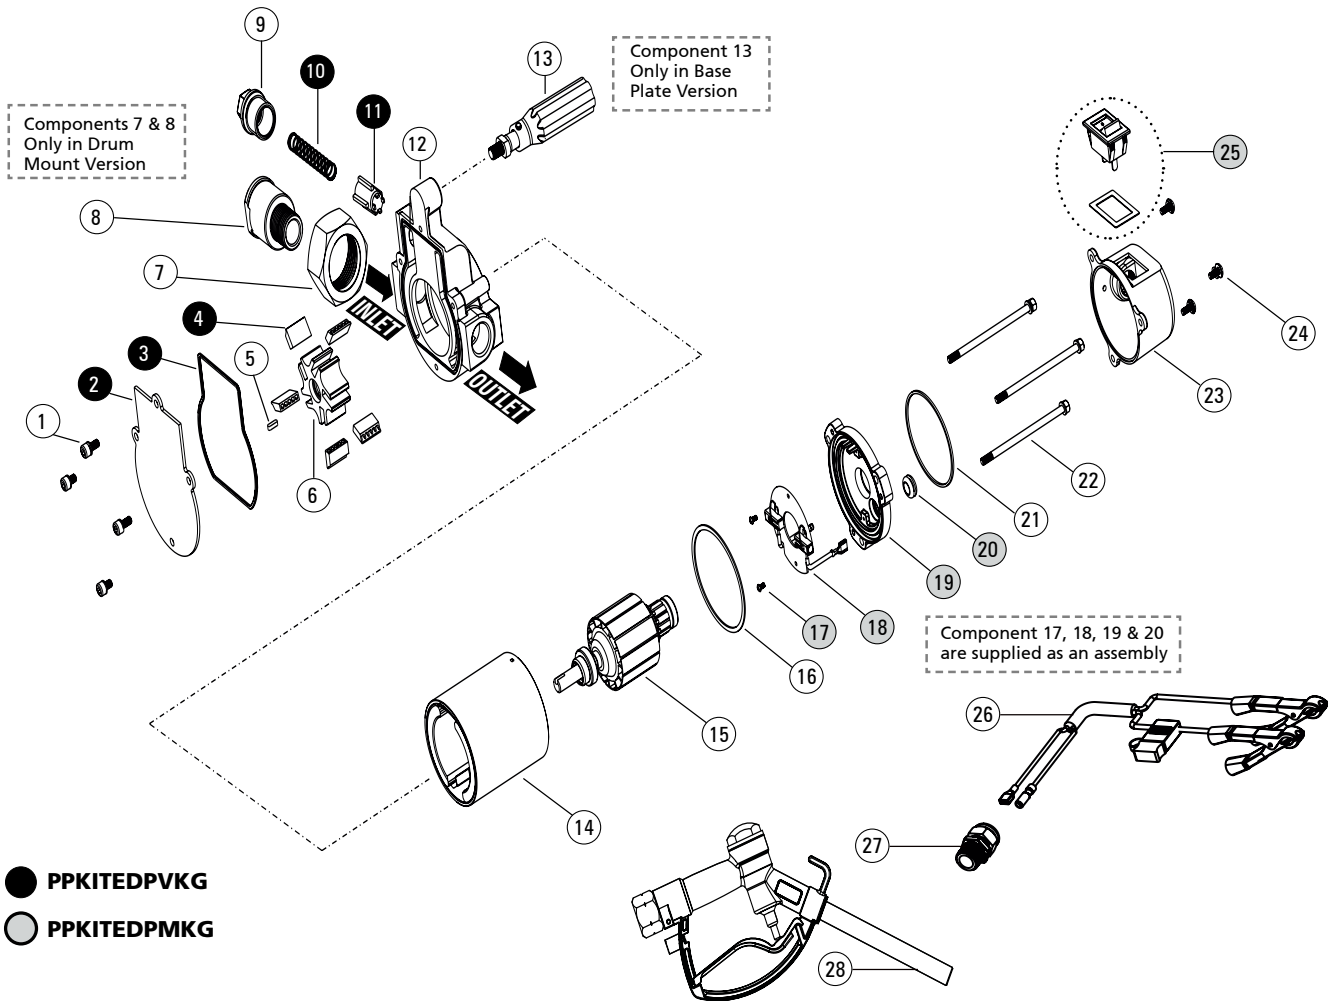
Exploded View for Dayton® Electric Diesel Pump
